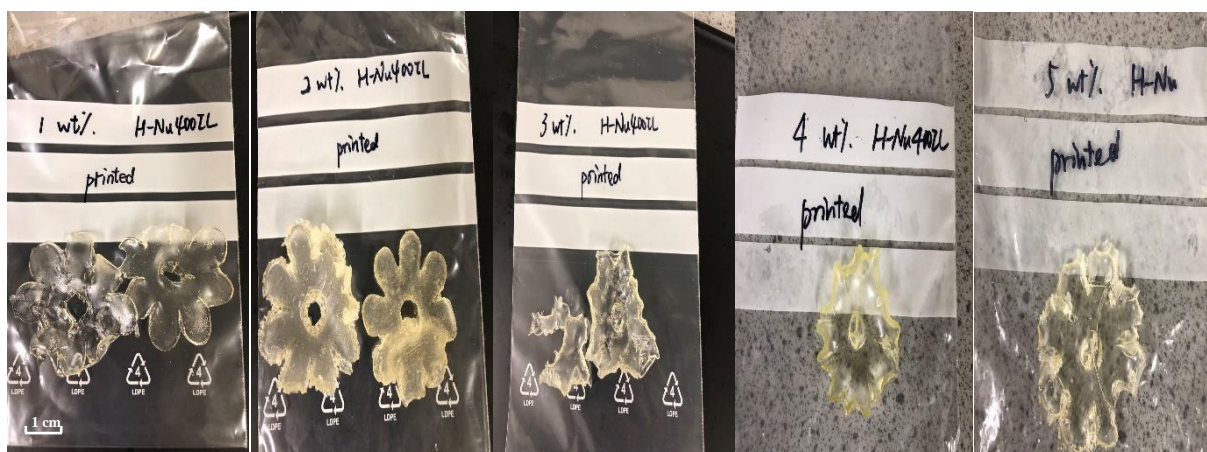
The flower-shaped parts printed using 1~5 wt% H-Nu 400IL homemade resin.
